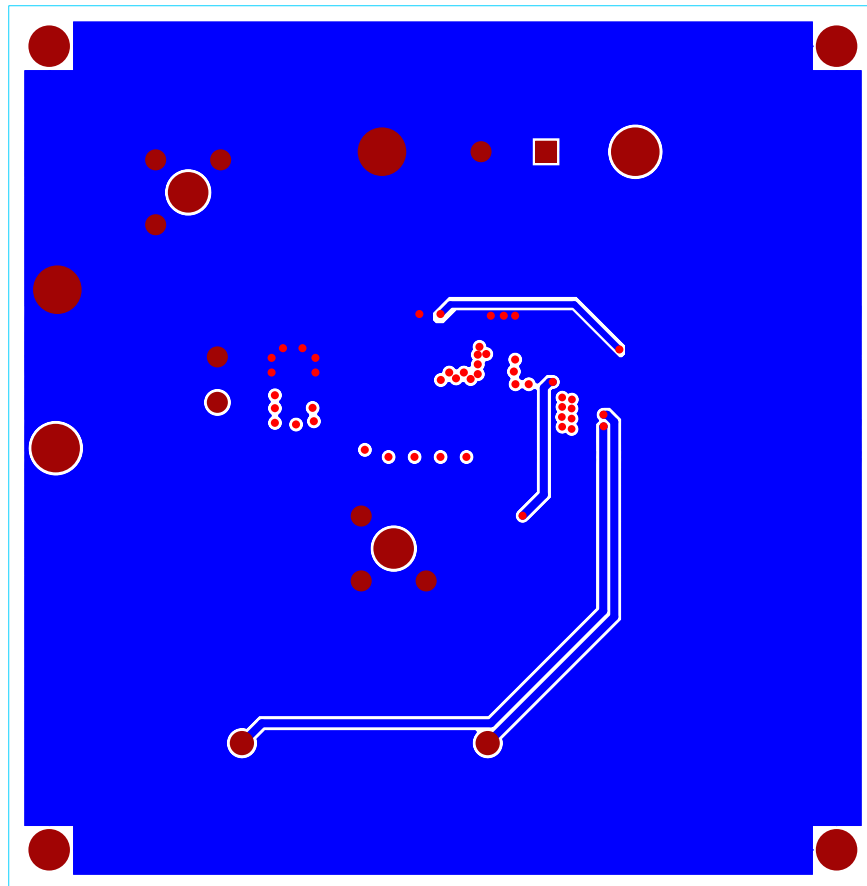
BOTTOM LAYER ETCH (Mirrored)
